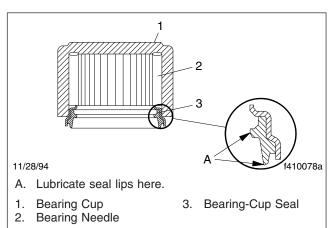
, Sectional View of a Half-Round End-Yoke U-Joint Bearing Cup
